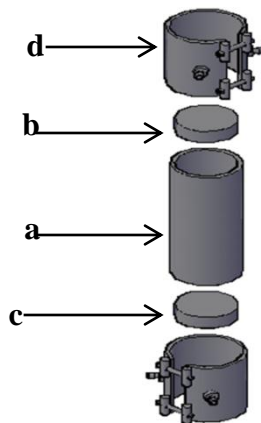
Pressing cylinder, disks and heating units. (a) Pressing cylinder, (b) Upper disk, (c) Lower disk, (d) Heating units.
